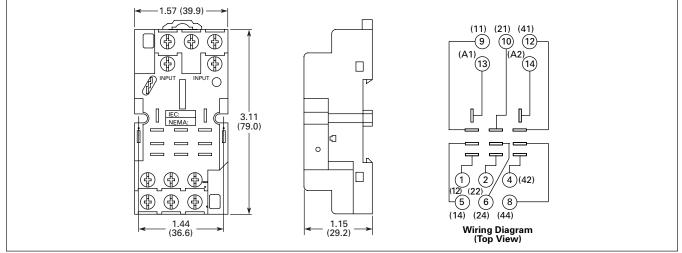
D7PAB — Approximate Dimensions in Inches (mm)
